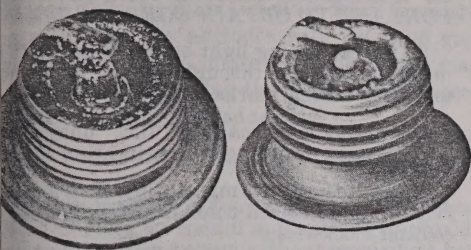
Faulty spark plugs. Left: cold plug used in an engine that should have a hot plug. Right: hot plug used in an engine that should have a cold plug.
